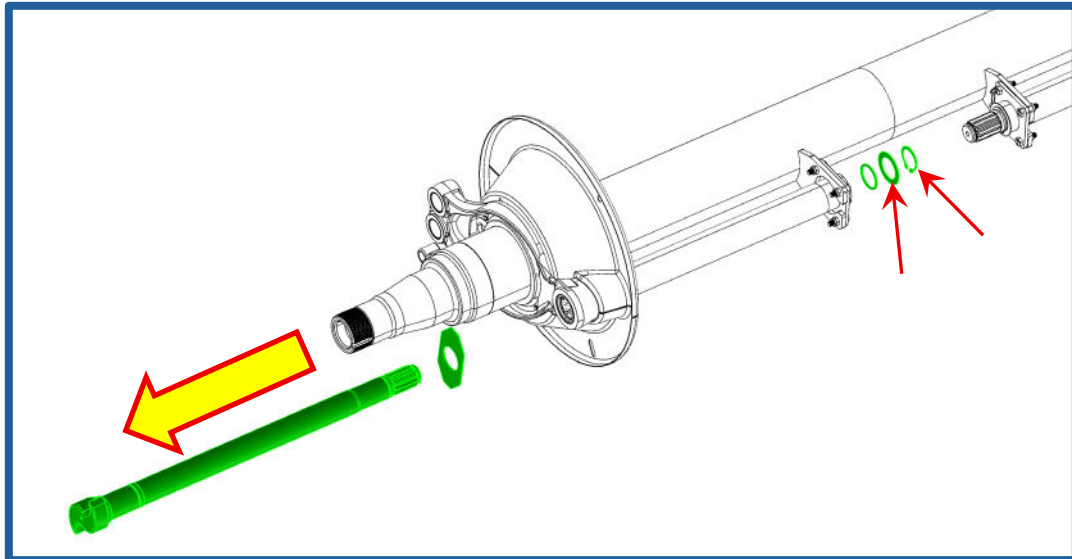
Remove the Retaining circlip and retaining Washer, Remove S Cam
